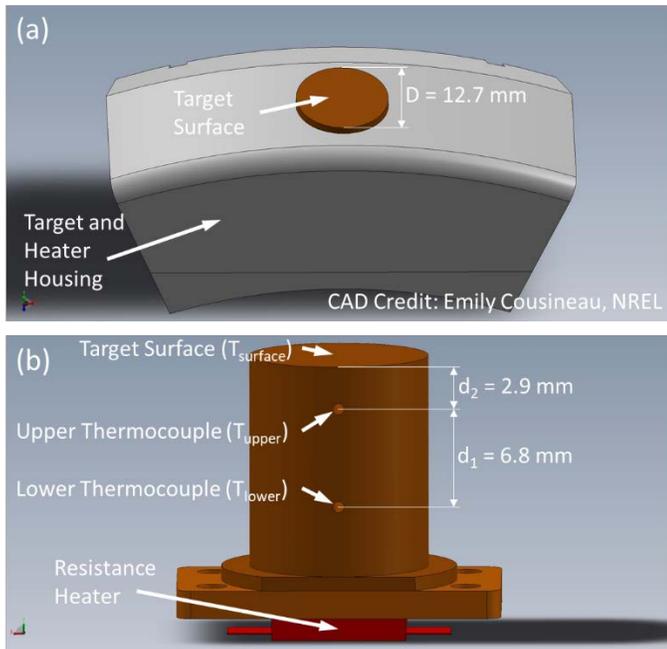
Heated target assembly: (a) assembled housing with exposed target resembling a section of electric machine end-windings, (b) copper target with thermocouple locations and resistance heater mounted on the bottom.
